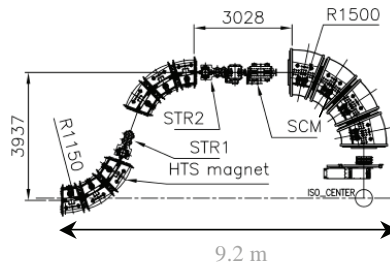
Layout of HTS deflecting magnets for the rotating gantry.
